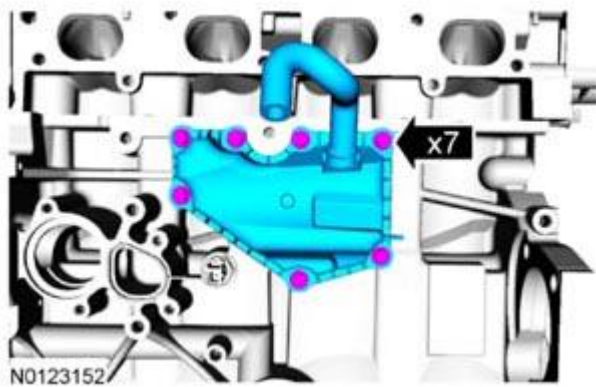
Locating Bolts And Crankcase Vent Oil Separator
